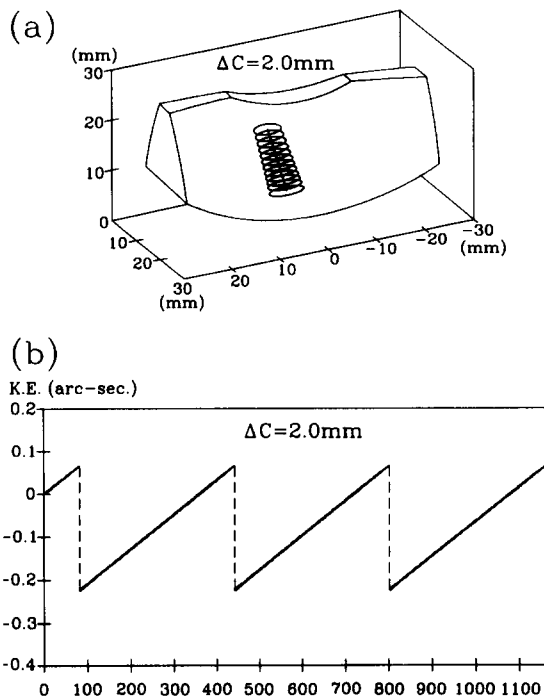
Bearing contacts and kinematic errors in a ZE-type worm gear set with centre-distance variation during the worm gear cutting process.
